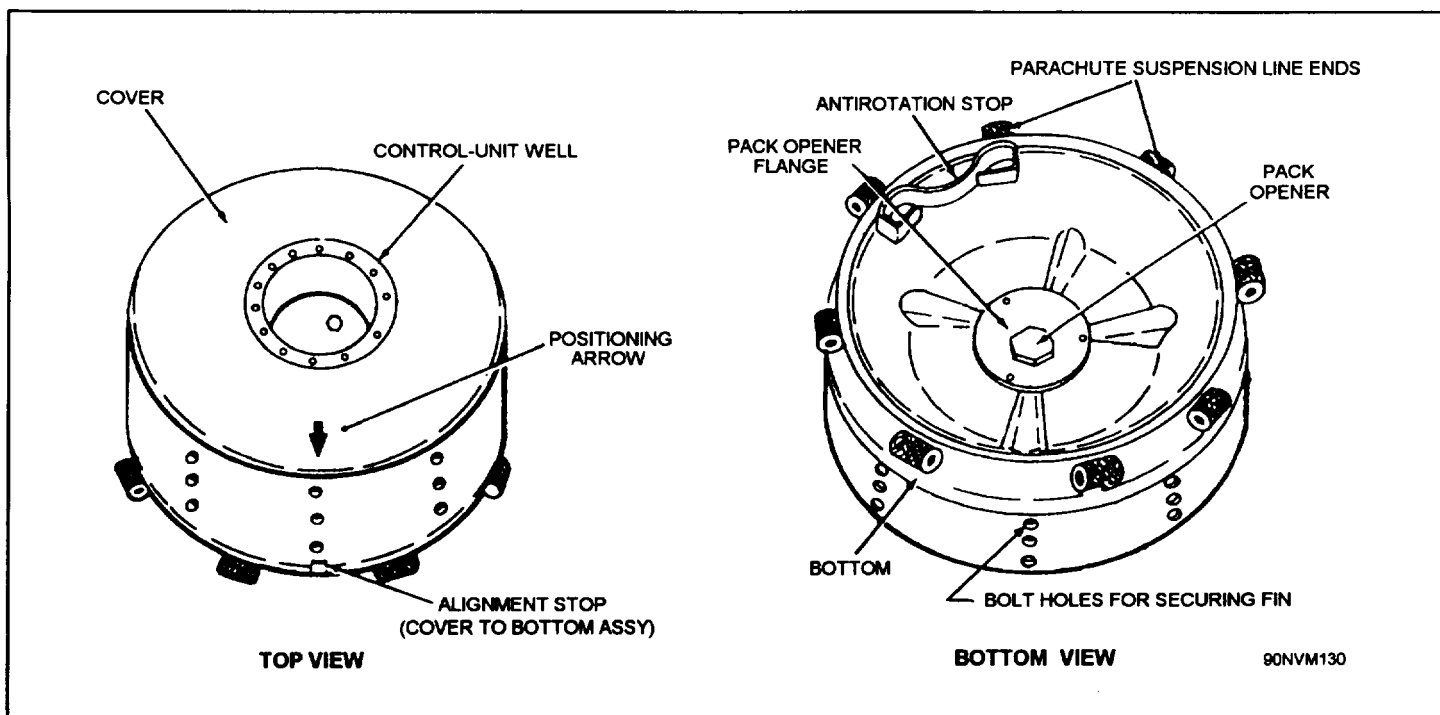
Mk 35 Mod 0 parachute pack assembly.
